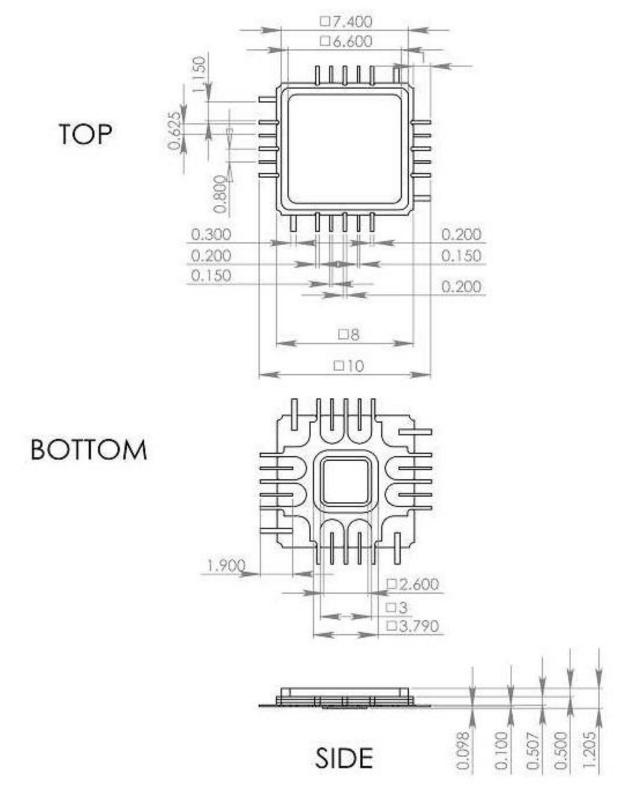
CQFP 24-Pin Package Drawing (All Dimensions in mm)
